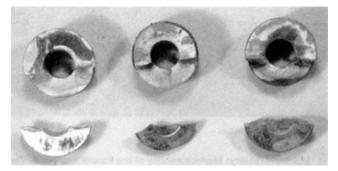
Shear Bolt Bushing Failure.
